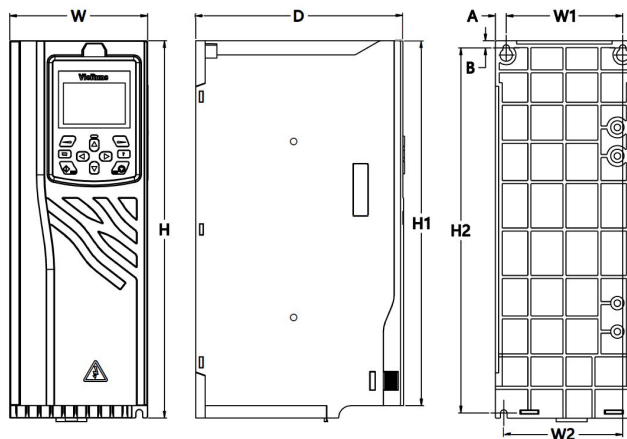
Schematic diagram of product appearance and installation dimensions
